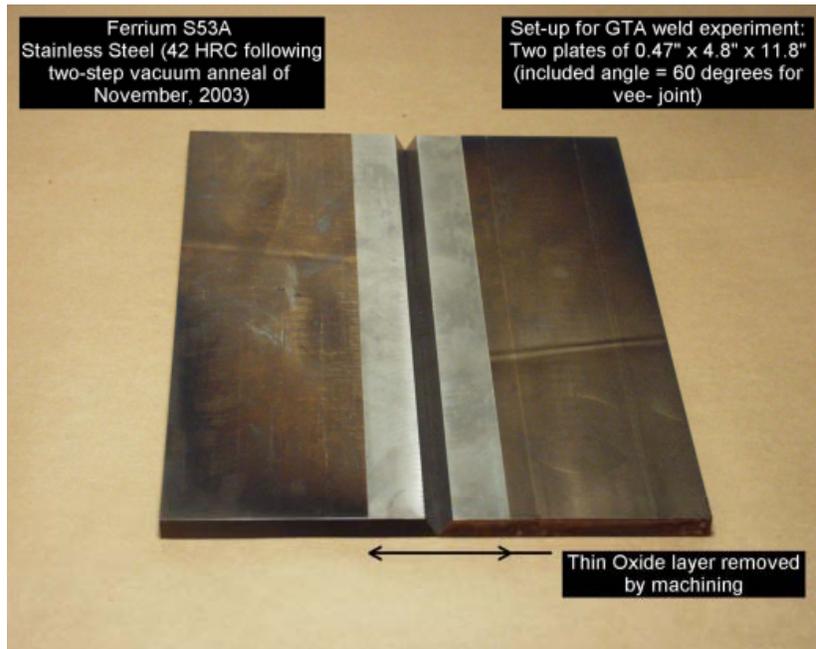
Photograph of two Test Plates abutted in position for the GTA welding experiment.
